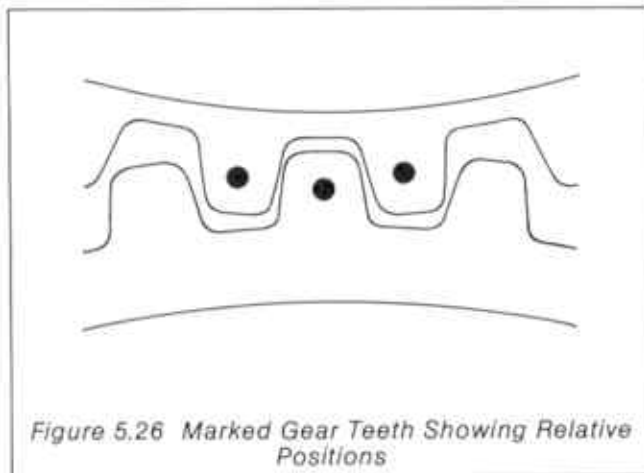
Marked Gear Teeth Showing Relative Positions
